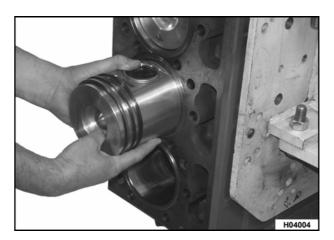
Removing piston and connecting rod assembly from cylinder sleeve
